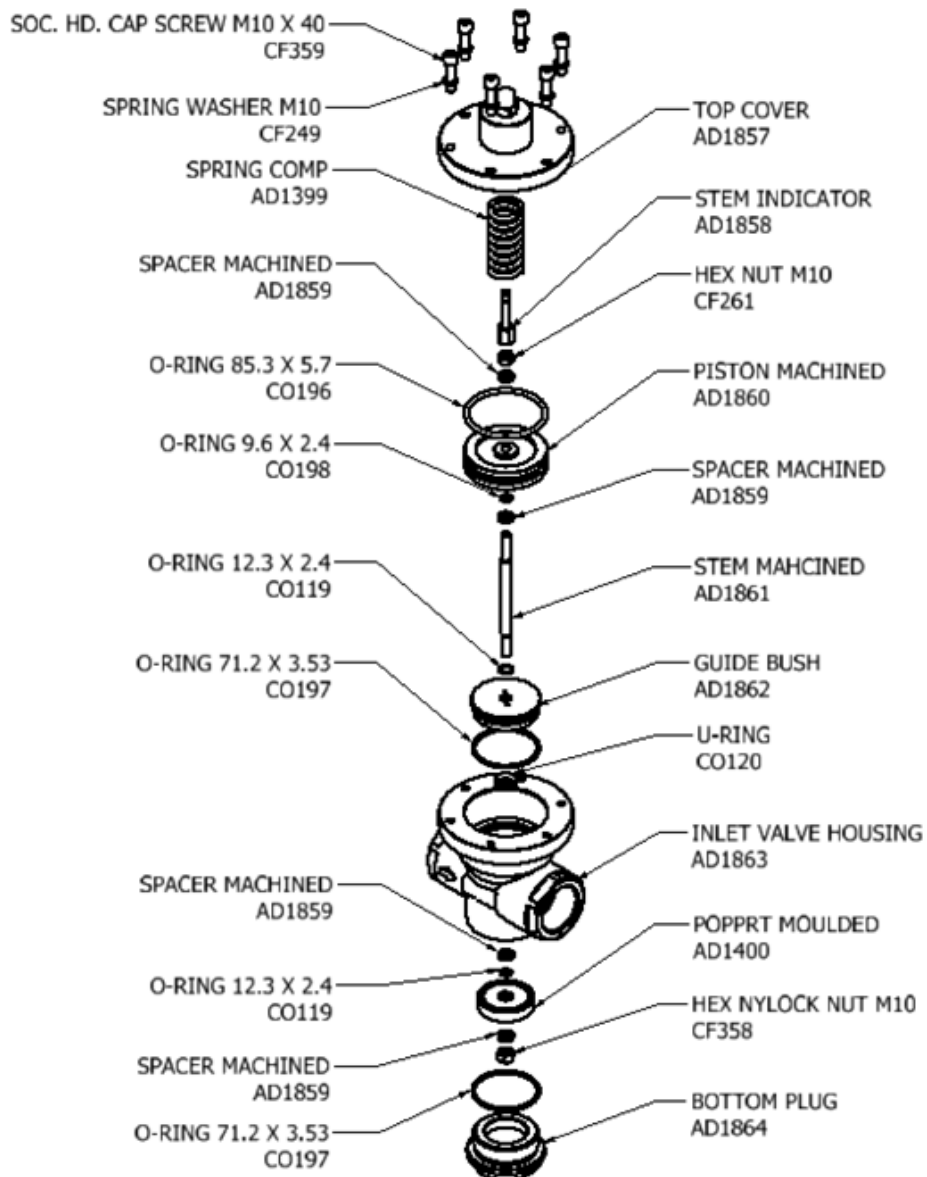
Exploded view of inlet valve assembly-Dryspell Plus model 300 & 375
